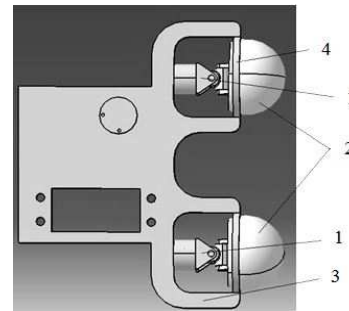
Eye assembly: 1- Cardan mechanism, 2- The two eyes, 3- Eye support, 4- Eyelids.
